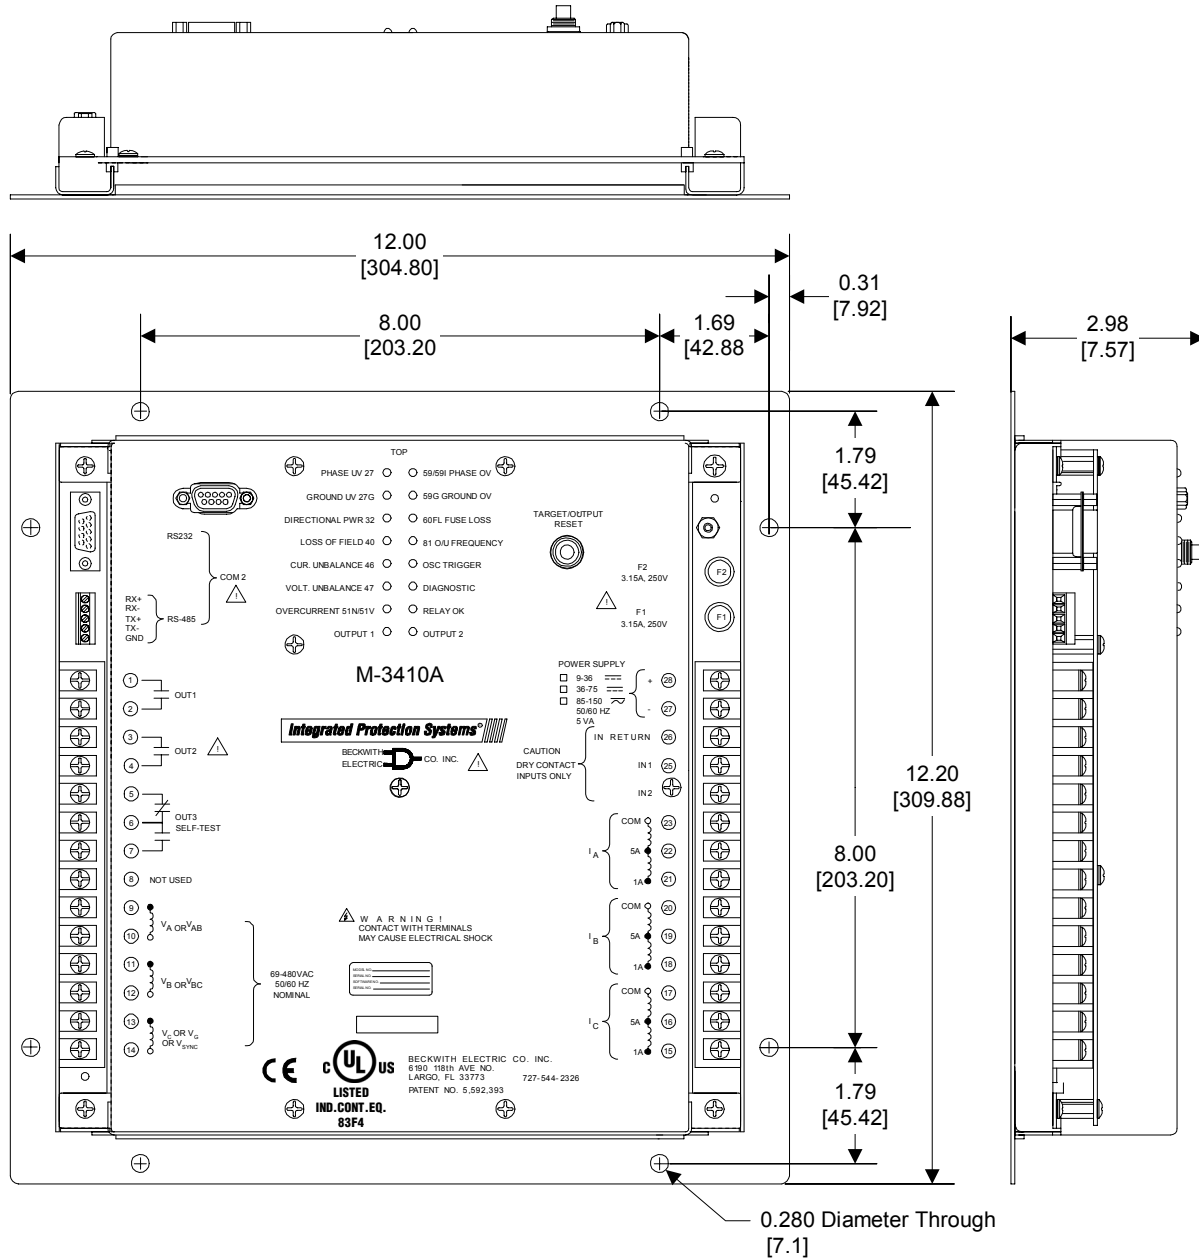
Surface Mount Version External Connections and Mounting Dimensions
